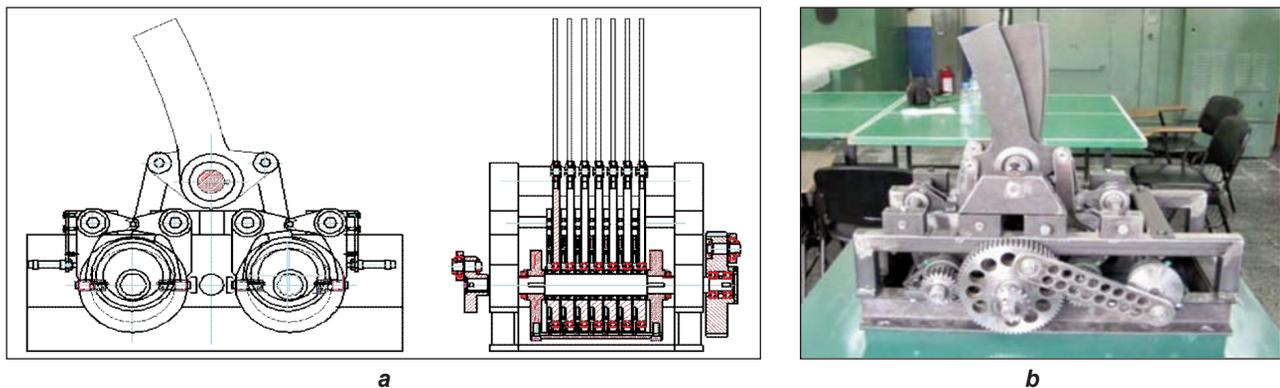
Rotary dobby: a – technical drawing of new dobby; b – mounted status of new rotary dobby [11]
